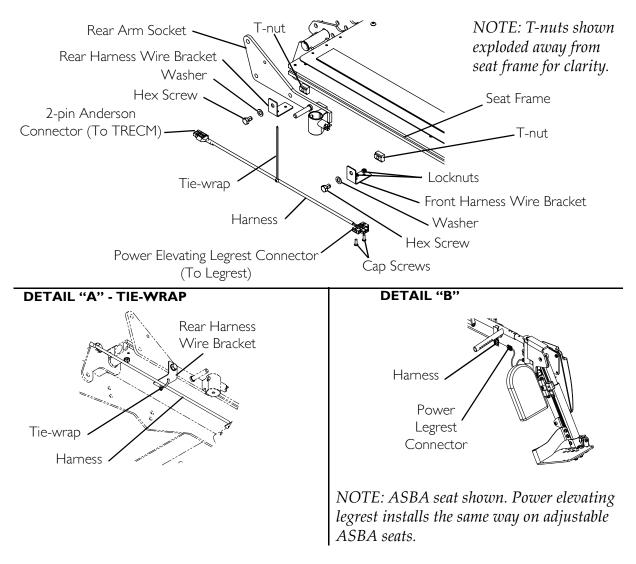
Removing/Installing the Power Elevating Legrest Harness
